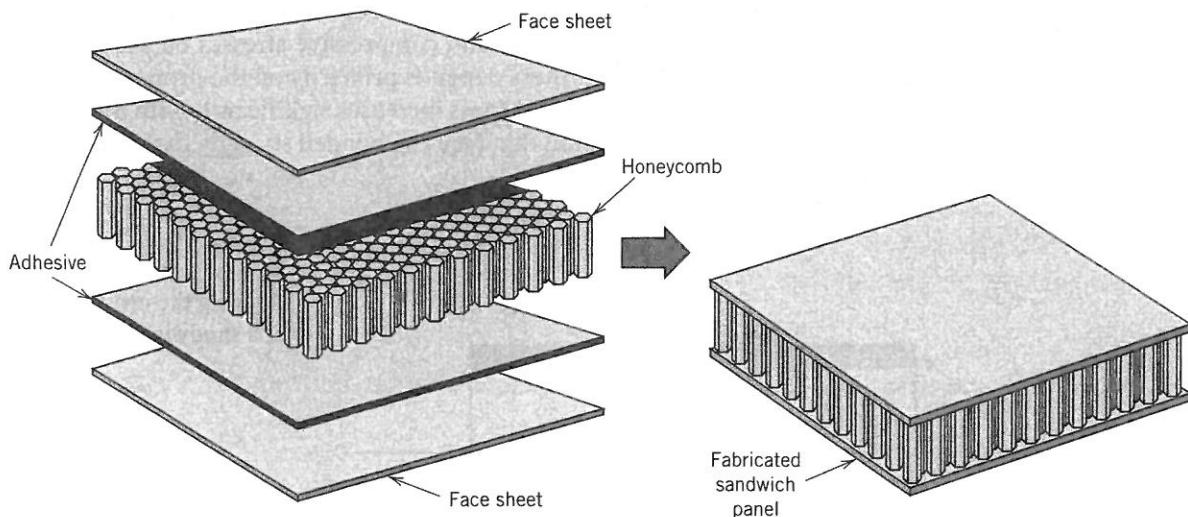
Schematic diagram showing the construction of a honeycomb core sandwich panel.
